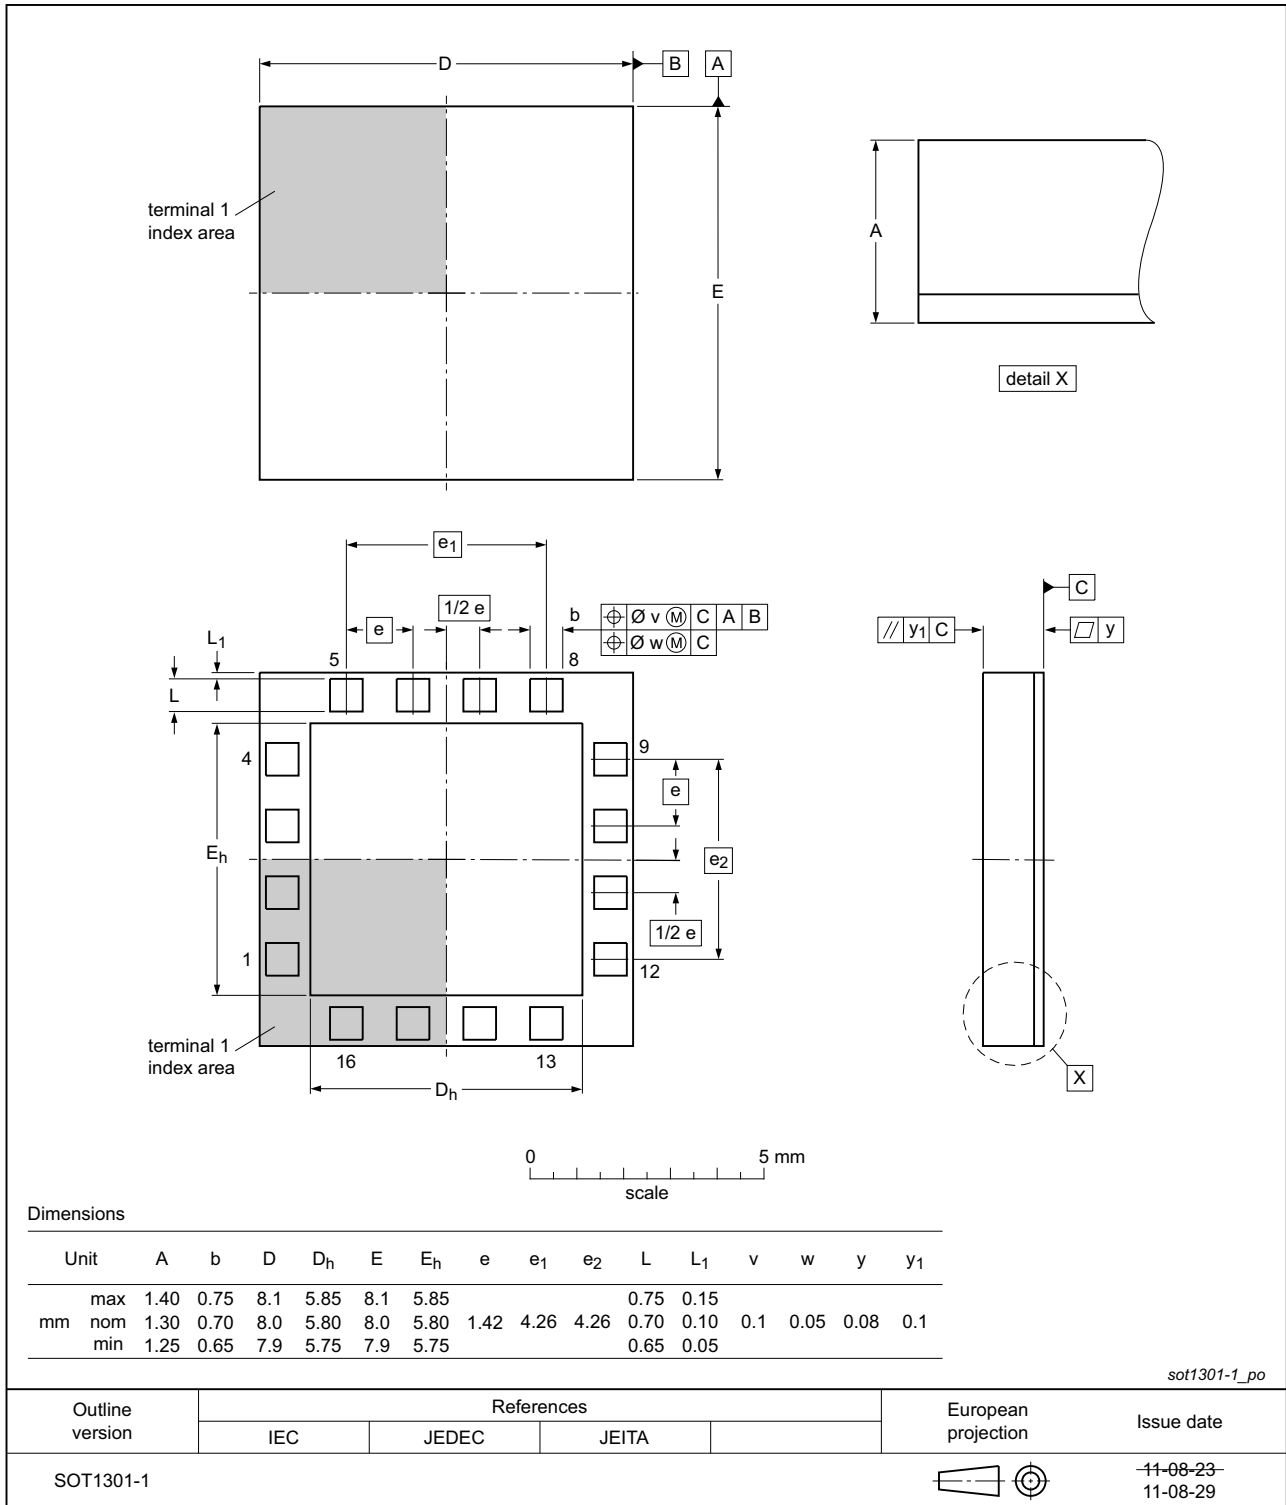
Package outline SOT1301-1 (HLQFN16R)
